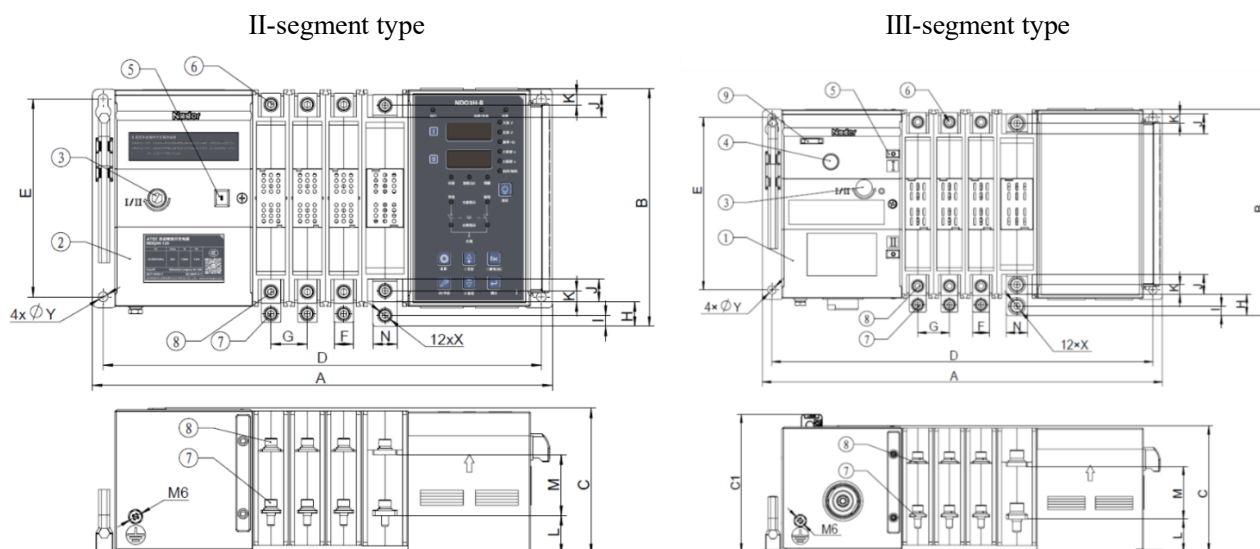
External Dimensions and Installation Dimensions of the Integral Switch
